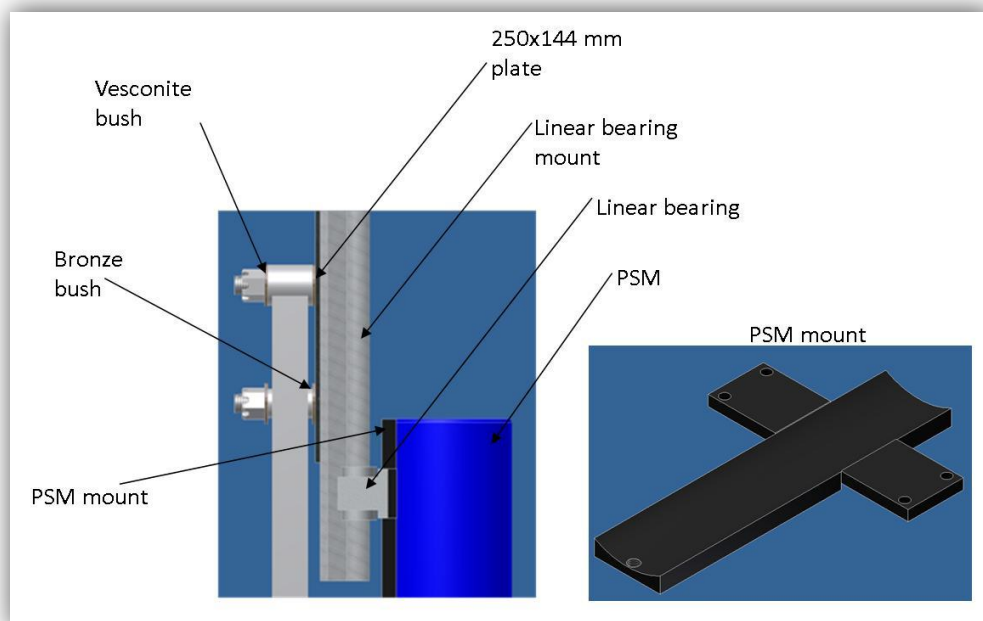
Attachment of PSM to bearing unit and manipulator arm
